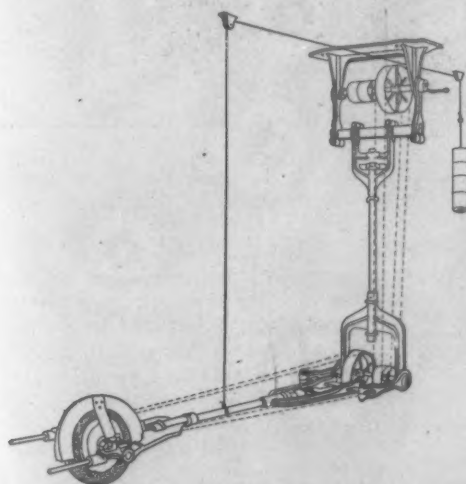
The Belt-Driven Center Wheel Type With Hood.
